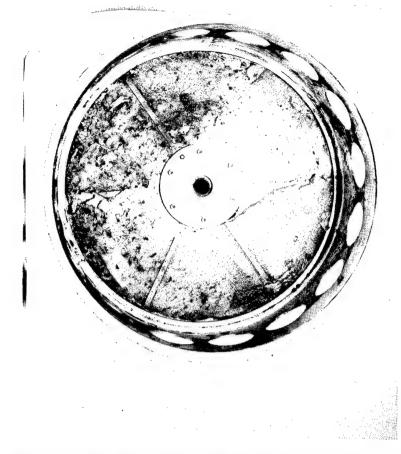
Twin Disc - Back Surface (Front Collector Removed)
